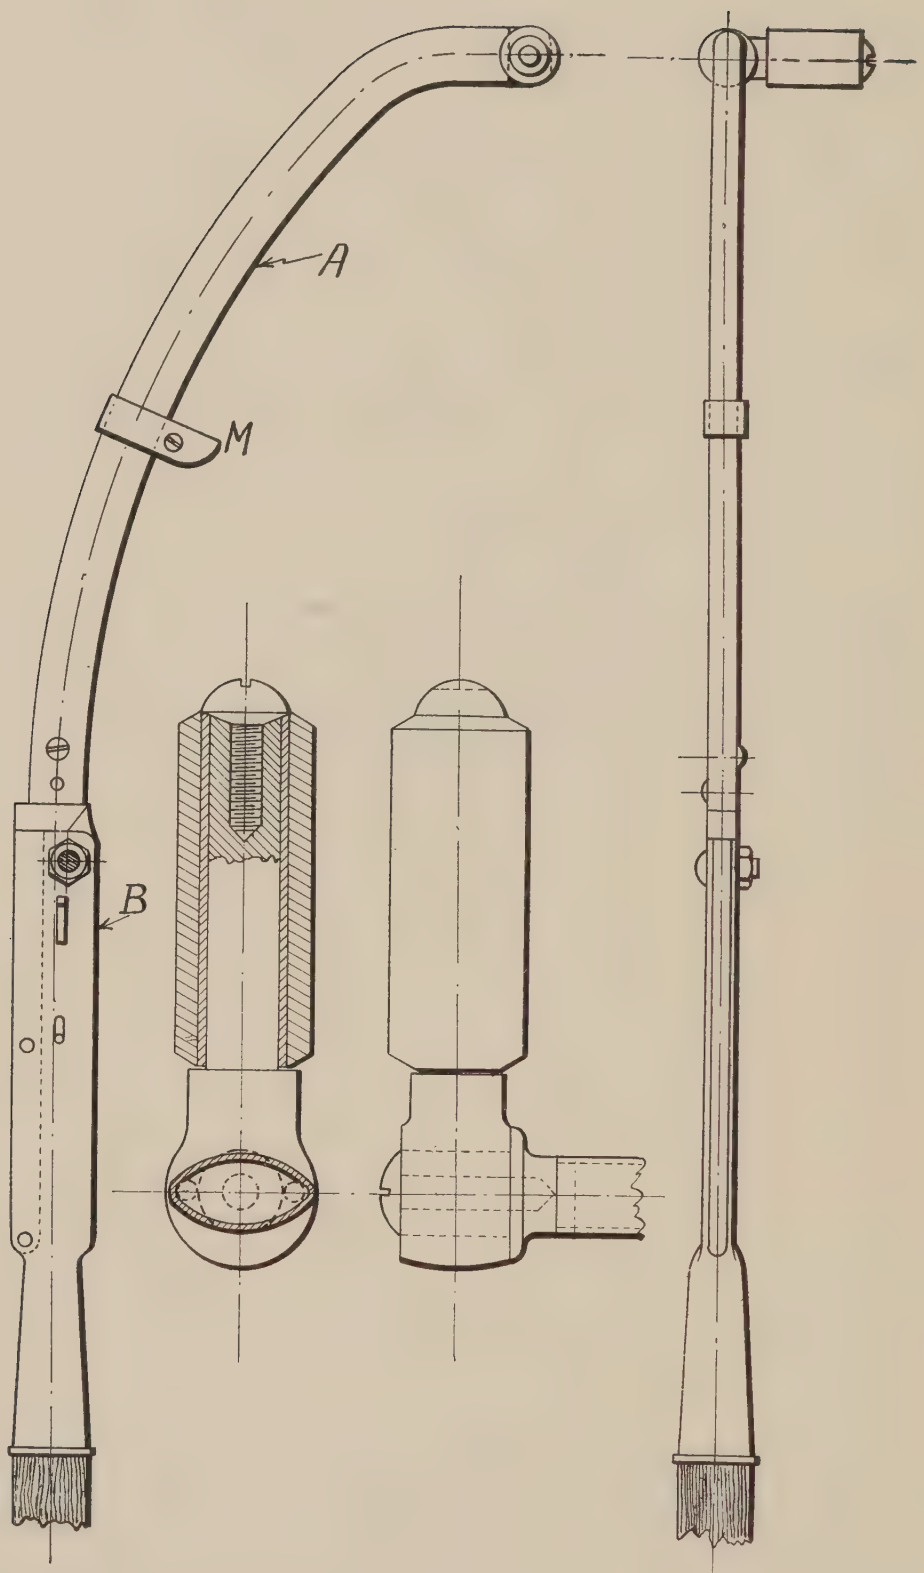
A.—“MICAULT” JOINTED BELT POLE (French Design).
